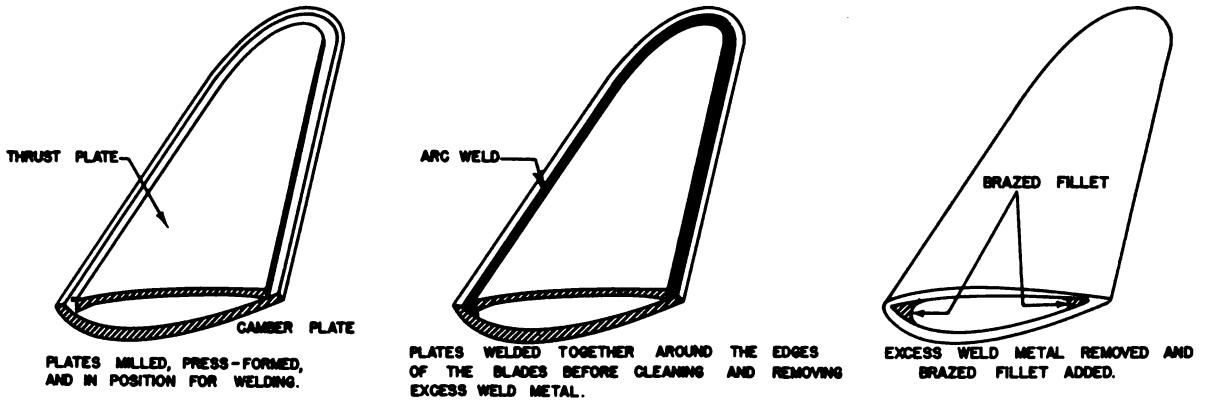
Welded hollow blade fabrication—type I.
